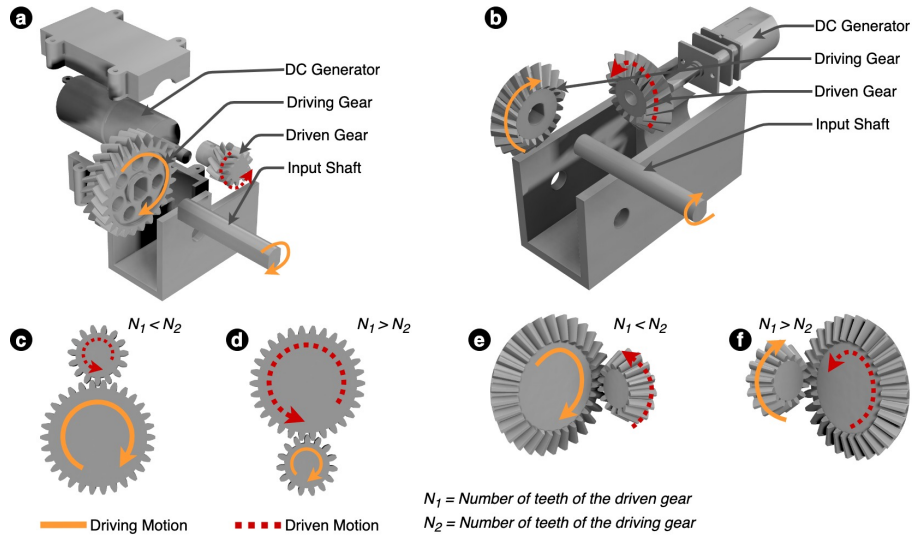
Exploded View of two example core mechanisms and gear ratio adjustment, (a) Exploded view of the inline shaft core mechanism, (b) Exploded view of the transverse shaft core mechanism, (c) Increasing and (d) Decreasing the number of turns in the inline shaft core mechanism using the herringbone gears, (e) Increasing and (f) Decreasing the number of turns in the transverse shaft core mechanism using the bevel gears.
